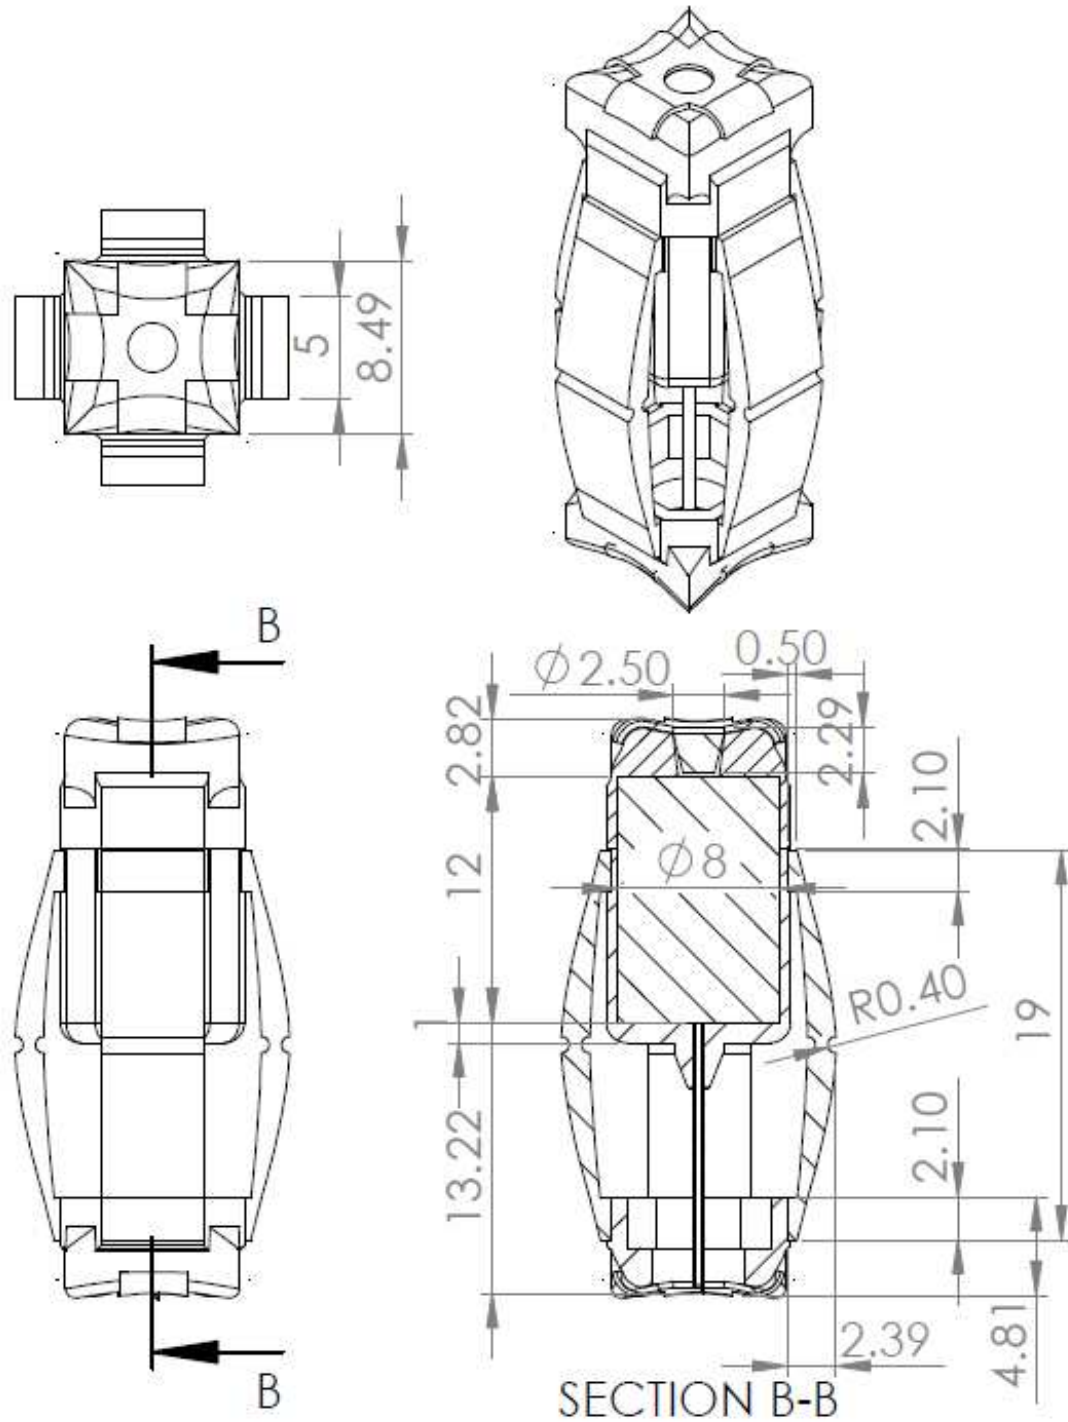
Mechanical drawing of B-MASCE. Dimensions of B-MASCE are shown in detail. Front, top, ISO view, and the section view are shown.
